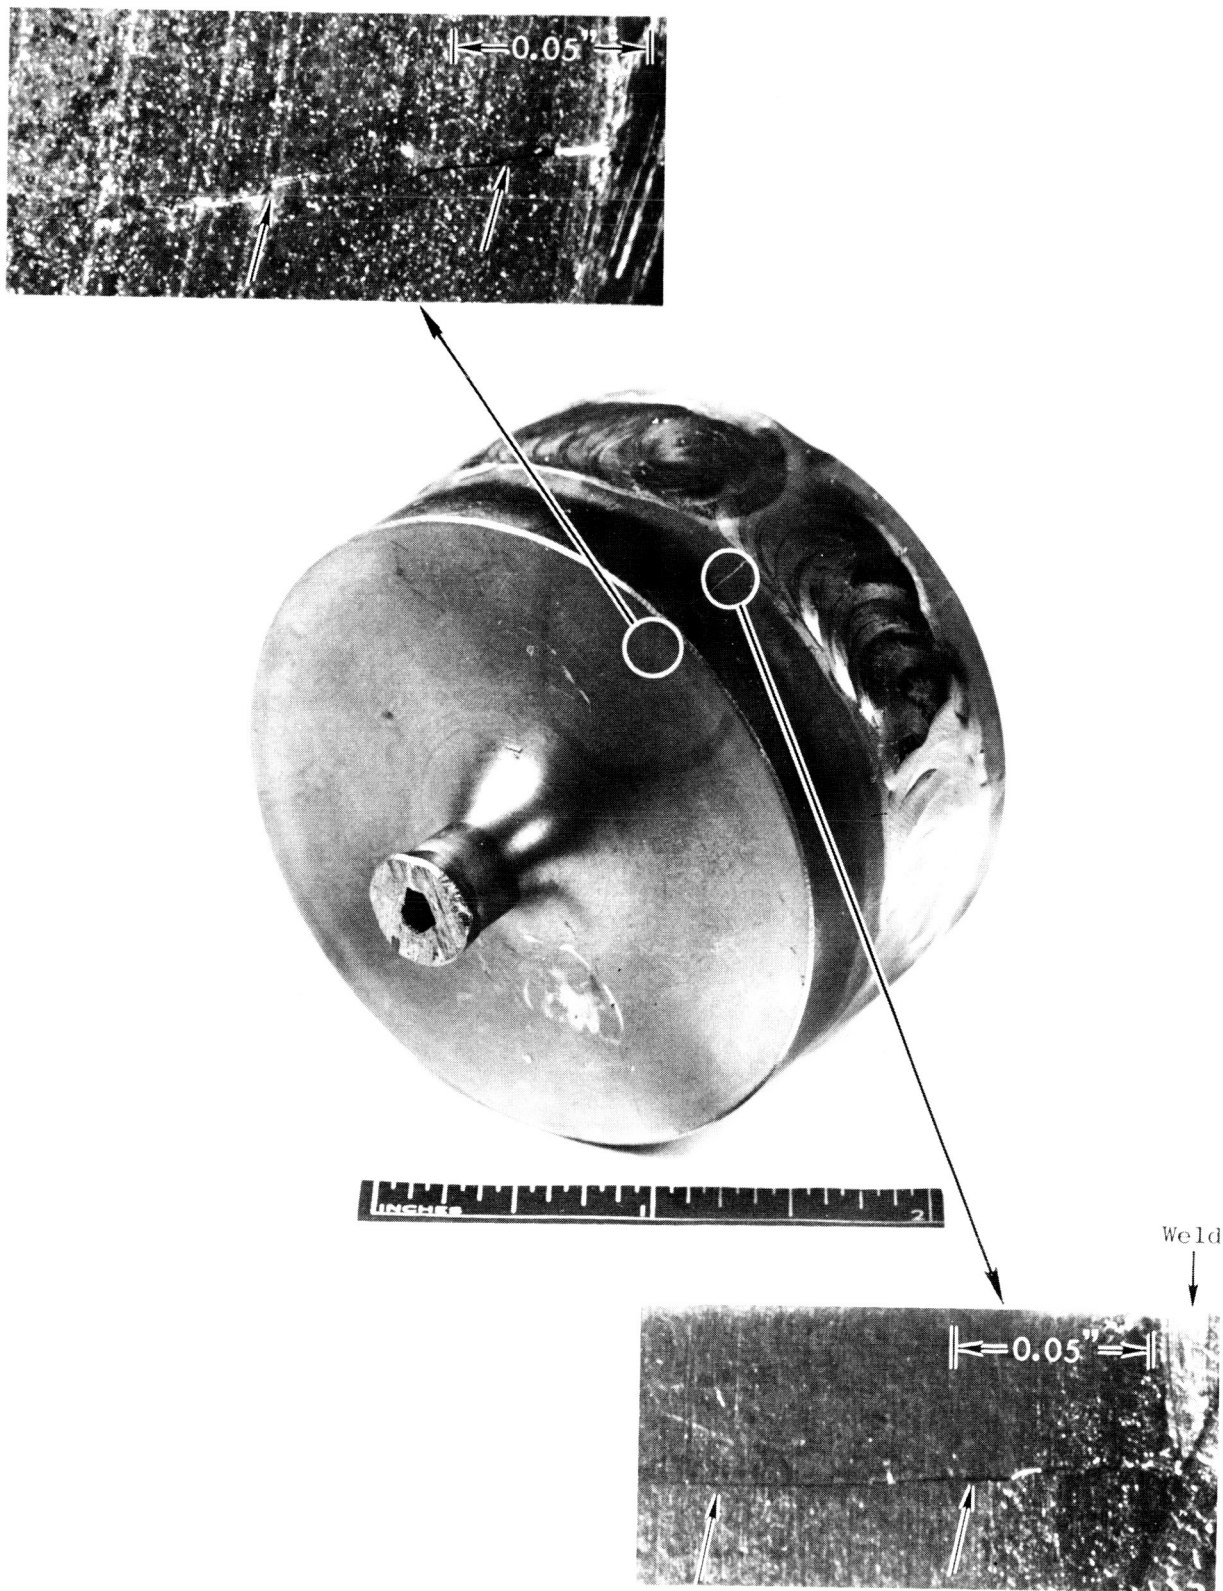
Taylor absolute pressure transducer 14 showing large crack (see arrows in enlargements of cracked areas) extending from edge of weld nugget to flat surface of bottom flange.
